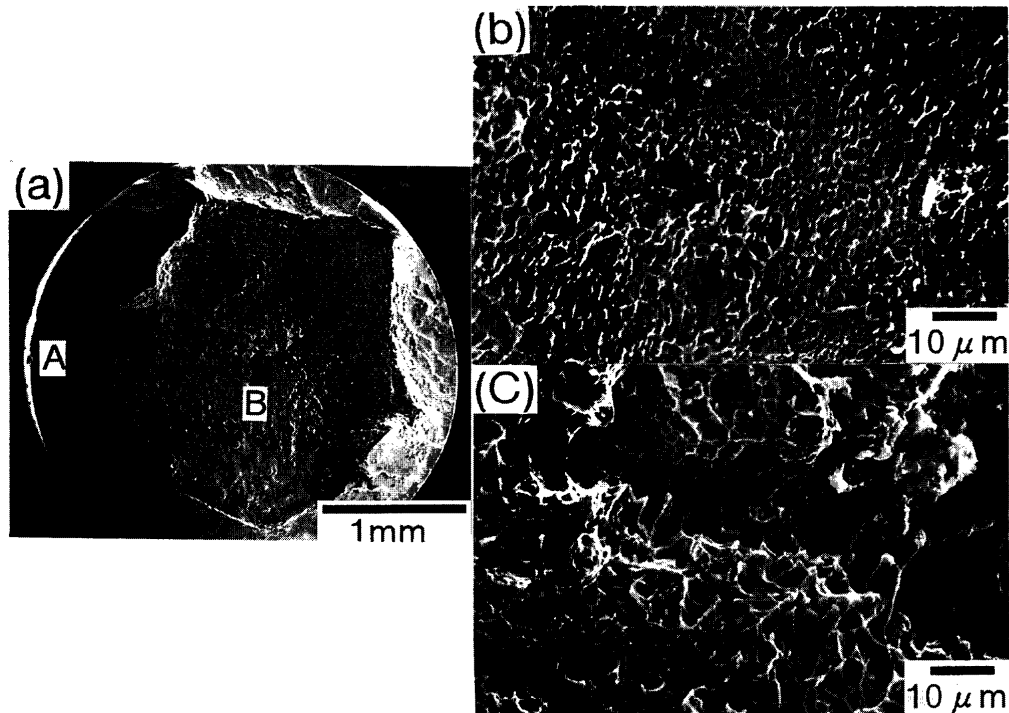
Fracture surface of a broken wire with 79% cold drawing.
